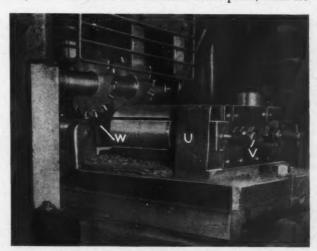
At this set-up on an Archdale machine, six slots are milled in each of four main pump rotors at one setting. A 2-station indexing fixture and two carbide-tipped cutters are employed
